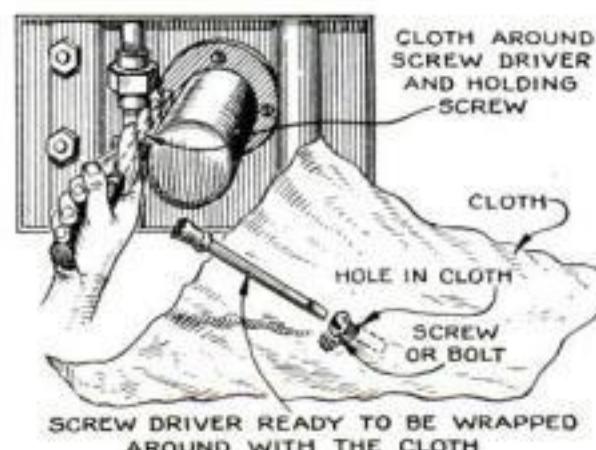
Screw pushed through a cloth can be held securely and threaded into hard places.
